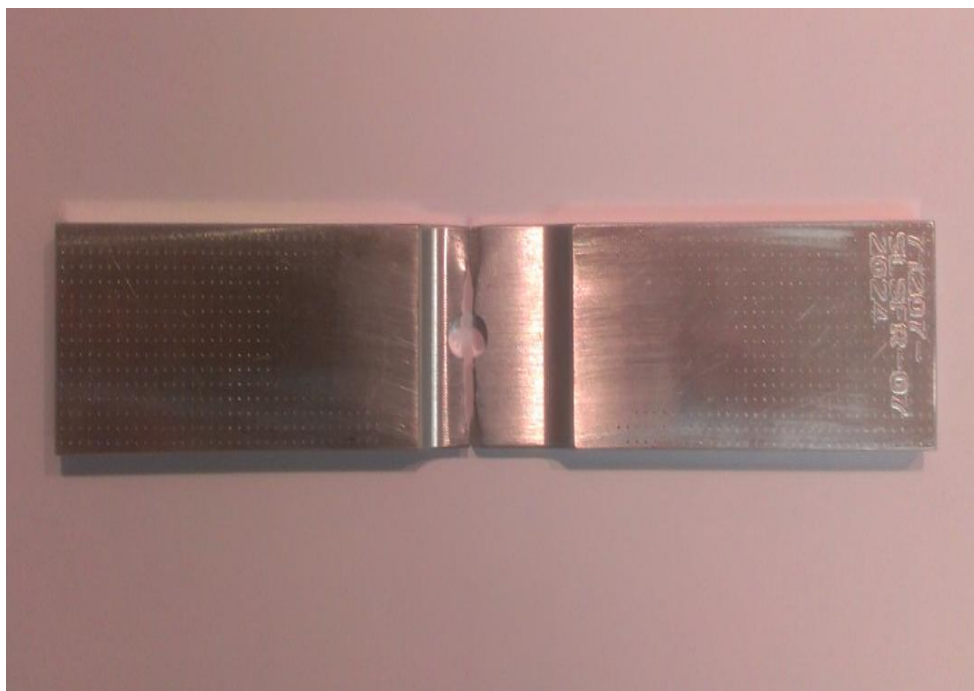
Open Hole in Radius Test Specimen -4 Post-Test Picture
